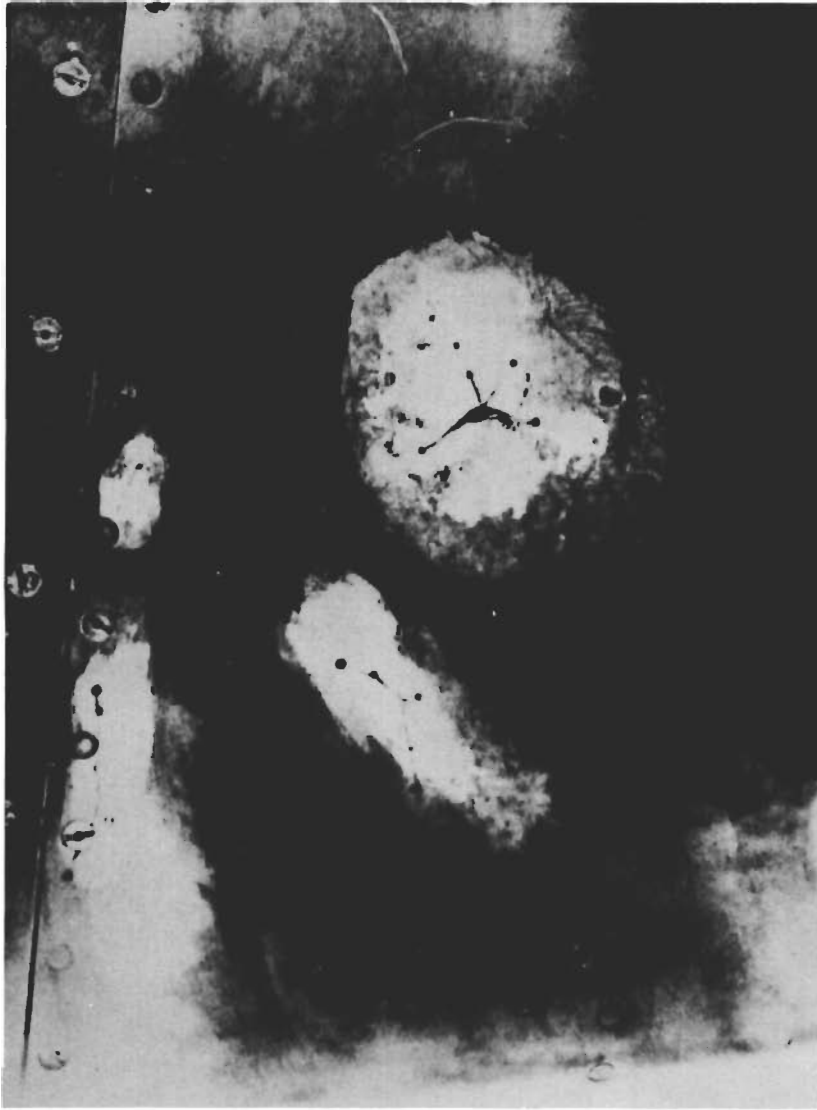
SPECIMEN DAMAGE - STAR CRACKS IN REAR FUSELAGE FAIRING
